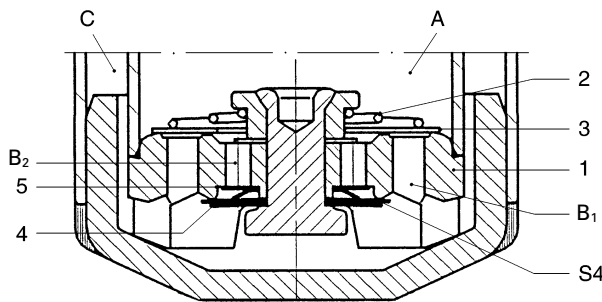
Bottom valve of the Sachs S27, S30 and S32 twin-tube dampers.
